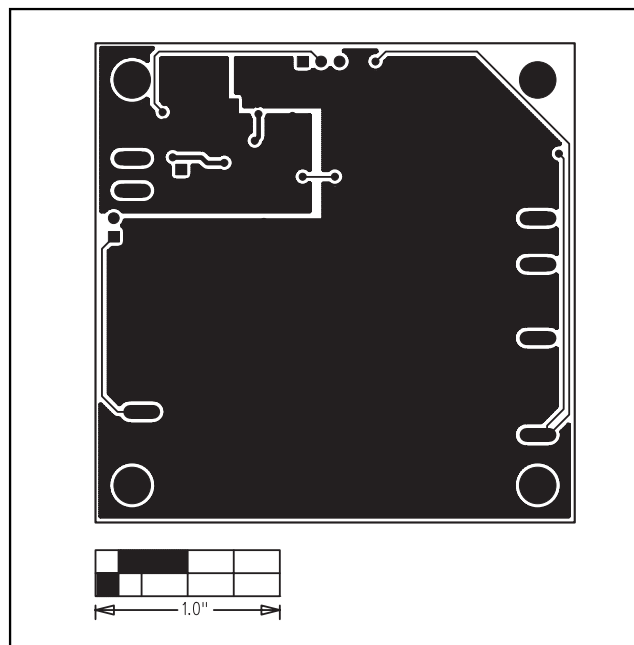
MAX15005A EV Kit PCB Layout—Solder Side
